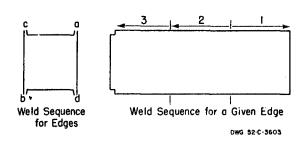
Welding Sequence for Molybdenum Furnace Muffle.
